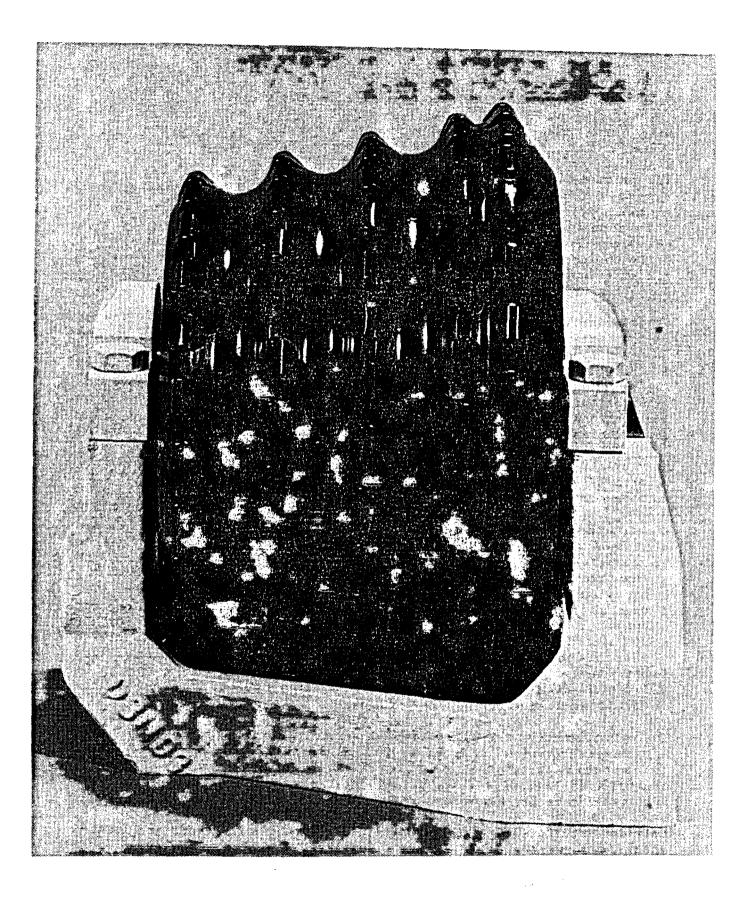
Five Row Cutter Carbide Insert Cutter
